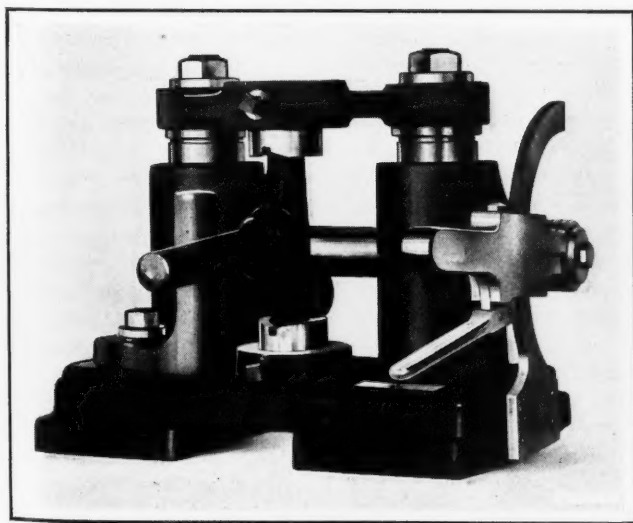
Cleveland Type A Universal Drill Jig set up for drilling a Hole in an Automobile Part
